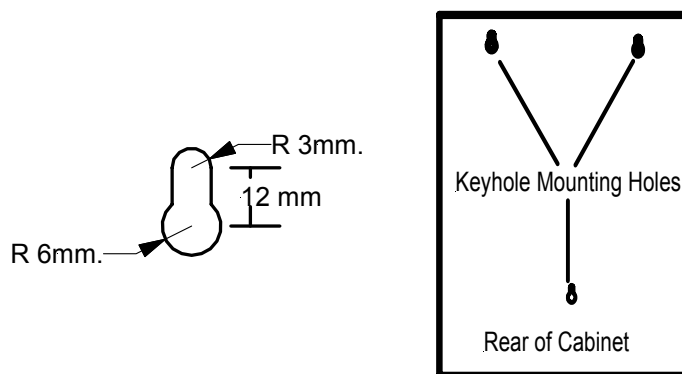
Example FireFinder™ Keyhole & Mounting Details
